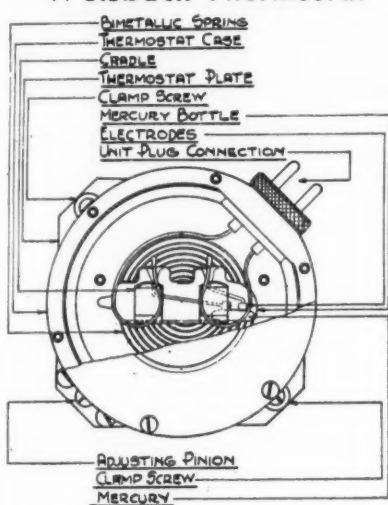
The Welsbach-built thermostat, described herewith, is mounted directly on the evaporator surface.
